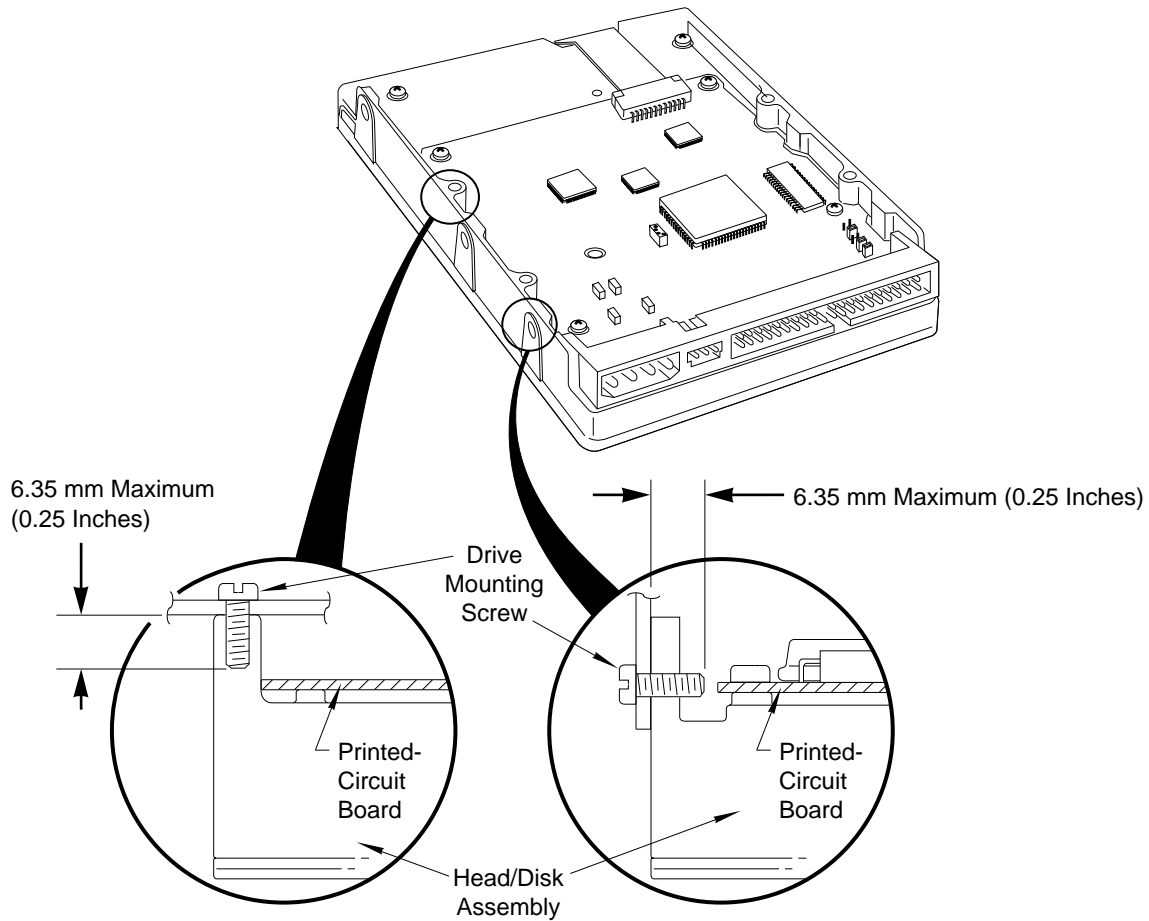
Mounting Screw Clearance for Quantum Fireball TM (Two- and Three-Disk) Drives
